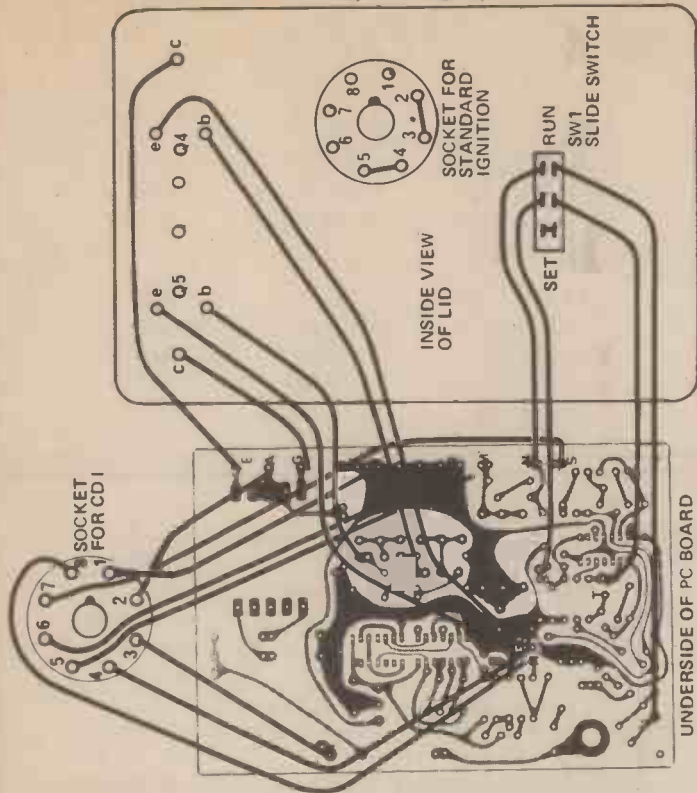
Wiring diagram - printed circuit board to front panel components.
